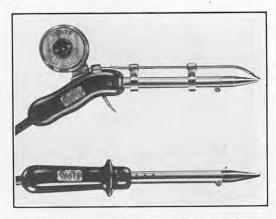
Soldering Irons; WOLF ELECTRIC Tools, Ltd.
